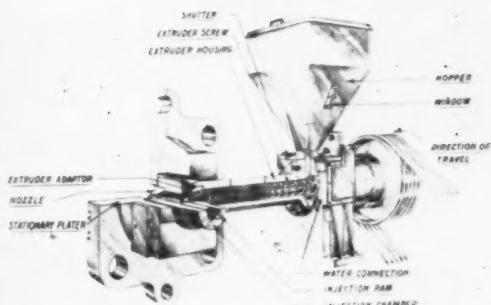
Cross-Sectional View of Plasticizing Section of Screw-Type Preplasticizing Injection Molding Machine
